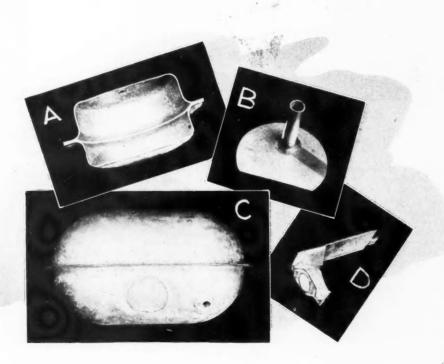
These photographs show some examples of furnace-brazed parts that were made during the research investigation by Lockheed engineers. (A) Cross section of an abuninum tank with flange type joint. (B) Tube to sheet aluminum. (C) 10 gal. aluminum hydraulic tank. (D) Aluminum furnace-brazed joint of sheet to machined
